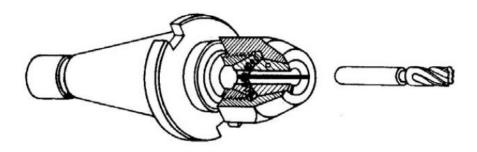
Mounting of cutting tools on milling arbours.
